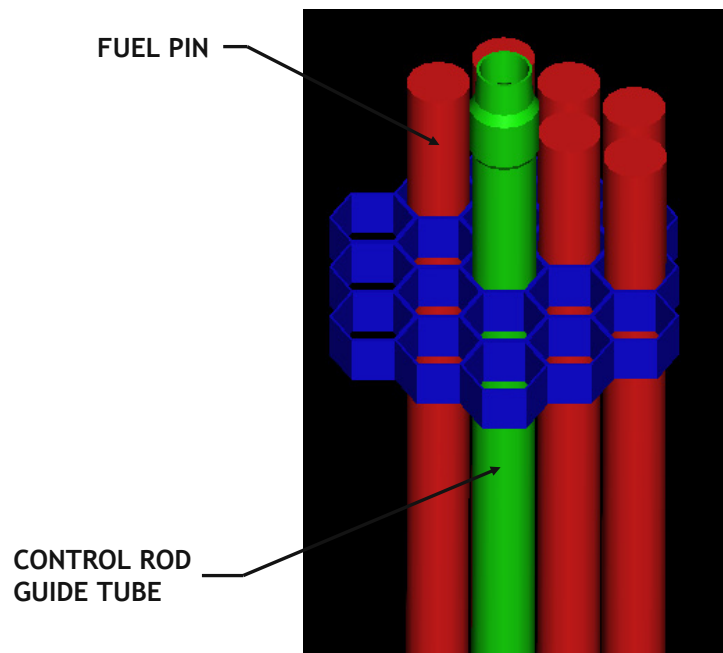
Illustration of SSTAR fuel pins held by grid spacers welded to control rod guide tubes.
